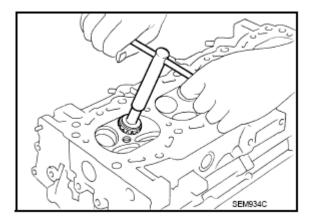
Finishing Valve Seat Using Valve Seat Cutter Courtesy of NISSAN MOTOR CO., U.S.A.
